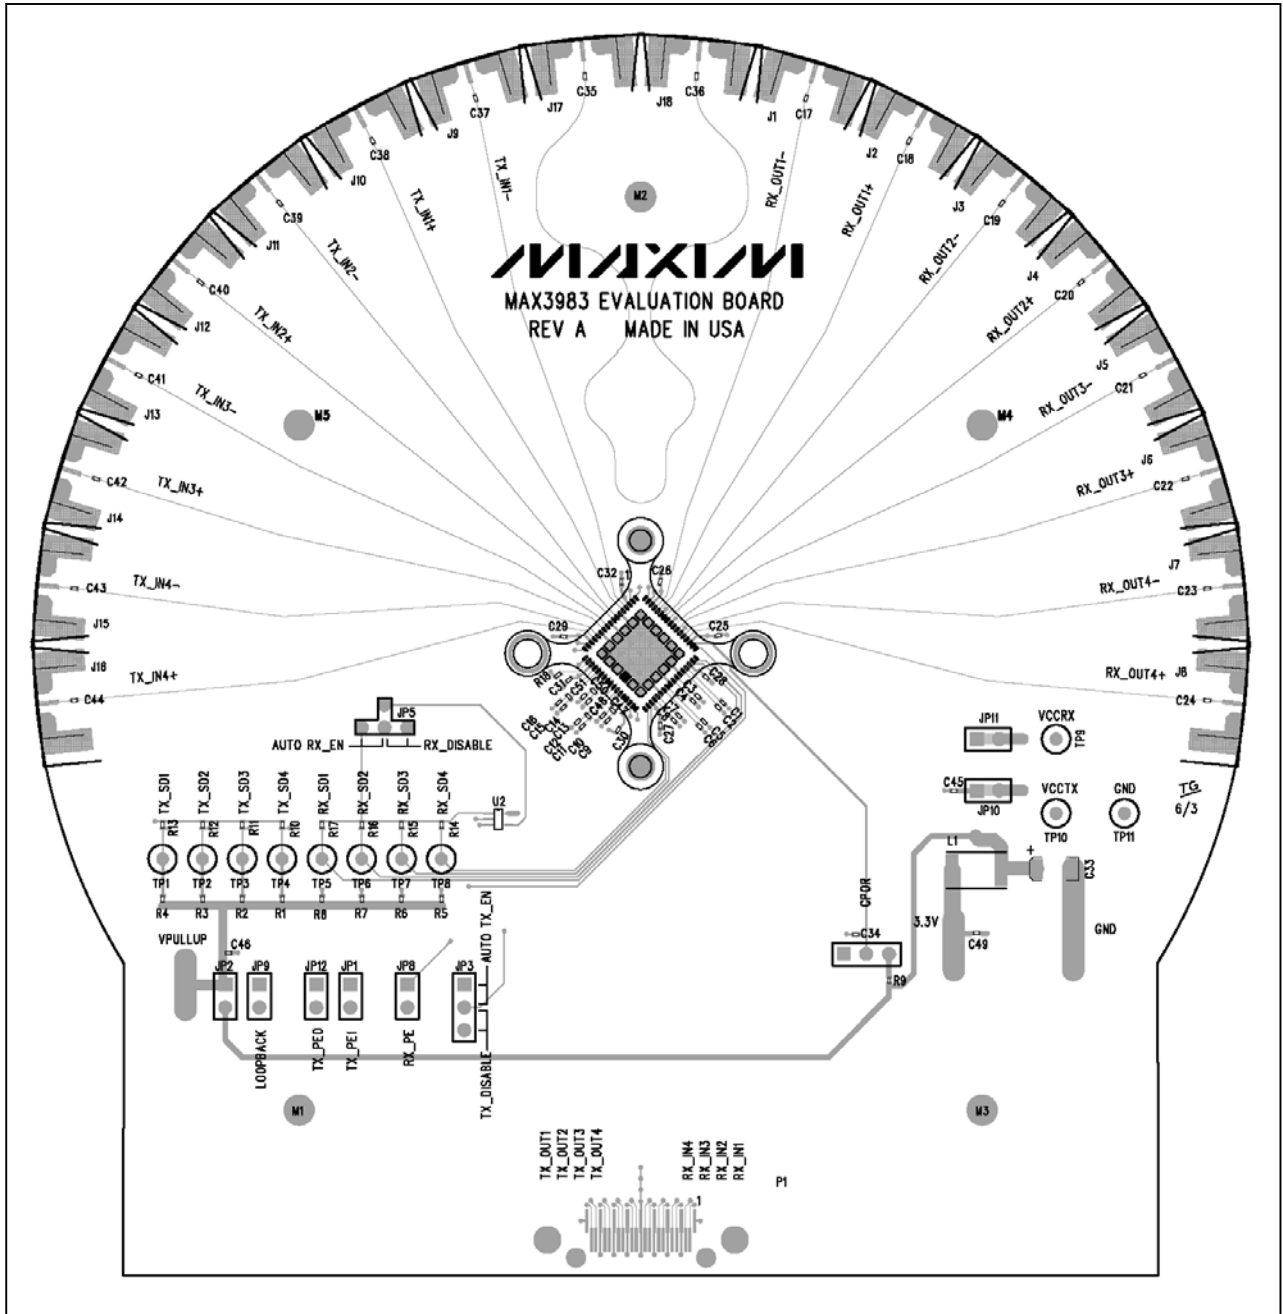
MAX3983 EV Kit Component Placement Guide – Component Side
